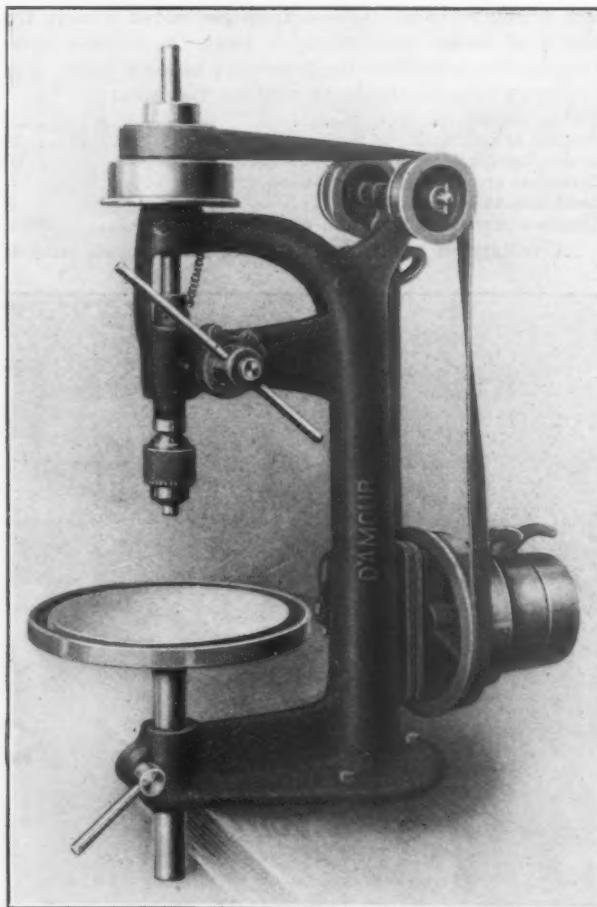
D'Amour's Improved 12-In. Bench Drill Press Made by the Charles Ramsey Company, New York.
